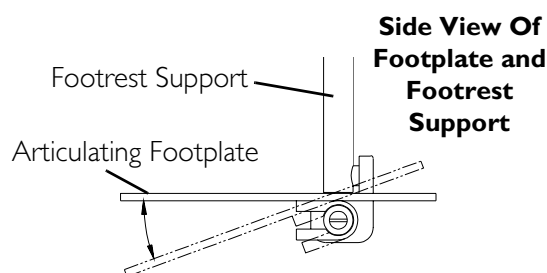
Adjusting Adjustable Angle Flip-up Footplates - Depth
